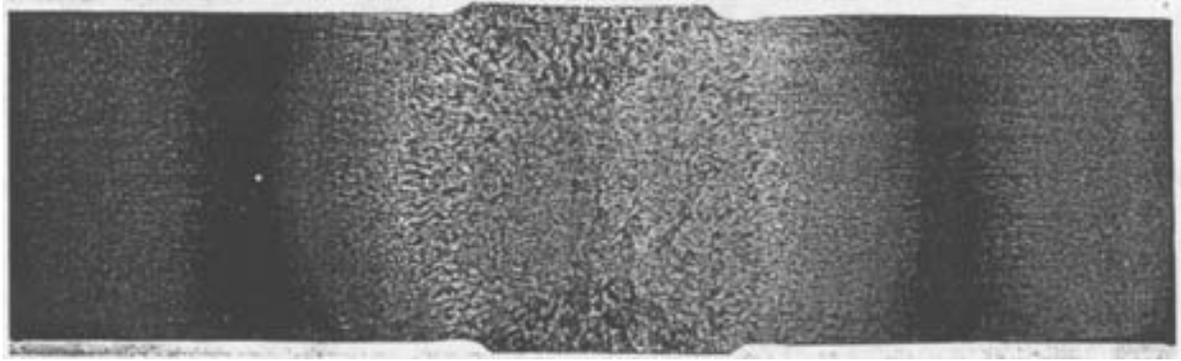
Cross section of an electroslag weld in 12-5-3 maraging steel showing the general structure and extent of the dark band or "eyebrow." Etchant: Lepito's Reagent. X 1 (Reduced 10%)
